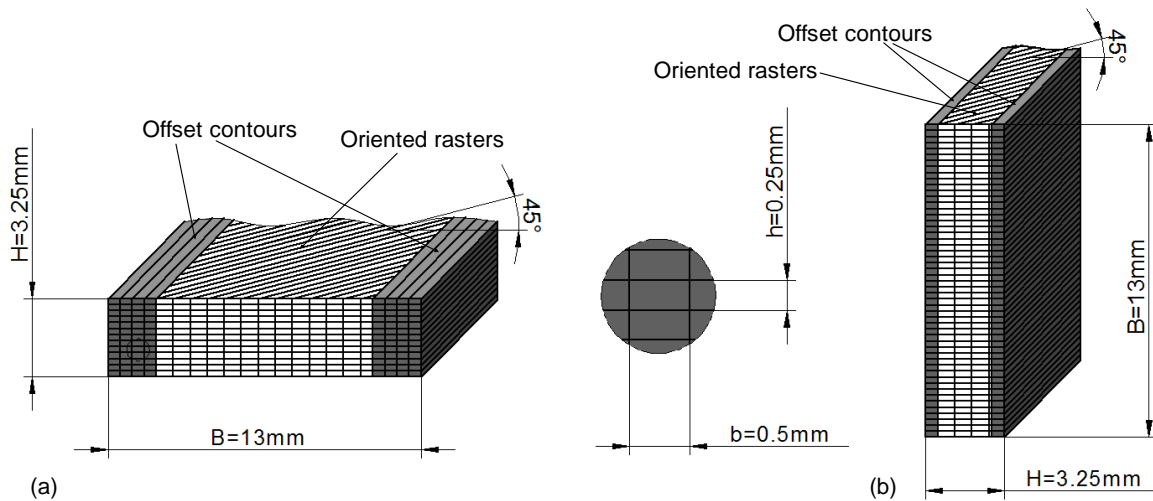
Generation of specimen types: (a) type 2 and (b) type 5, with details on geometry and main dimensions
